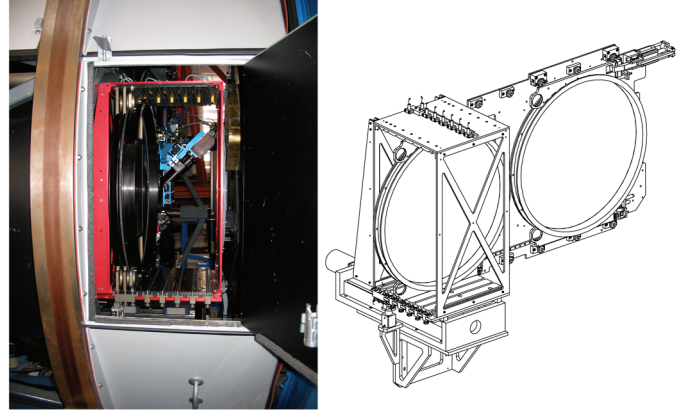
Left*: The MSS installed in the IMACS forward compartment, as it is seen (but through a door in one of the enclosure panels) when a mask is about to be loaded. *Right*: Engineering drawing of the complete assembly, showing the pneumatically activated insertion system that loads one mask into the telescope focal surface, just ahead of the IMACS field lens. The slit mask is pushed against a hard stop by a pneumatic actuator (*bottom*), and a clamp on top grabs the slit mask through a small pocket in the upper wing.
